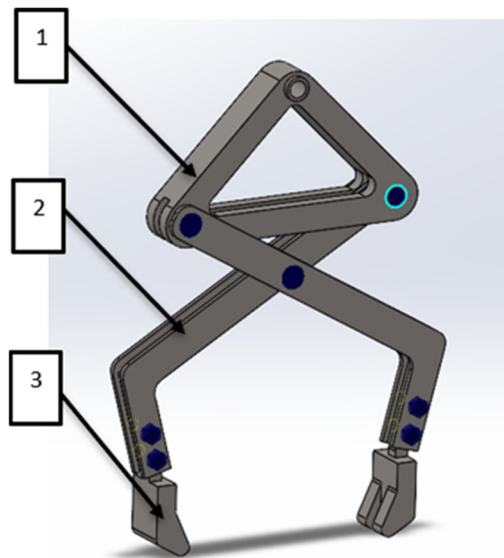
3D model of the proposed clamp-type gabion gripping device
